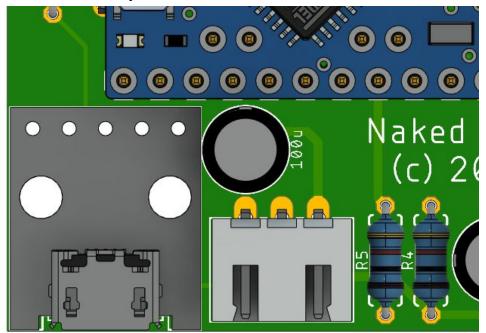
Bottom view of VU Stick V1.2 PCB with micro USB module.
